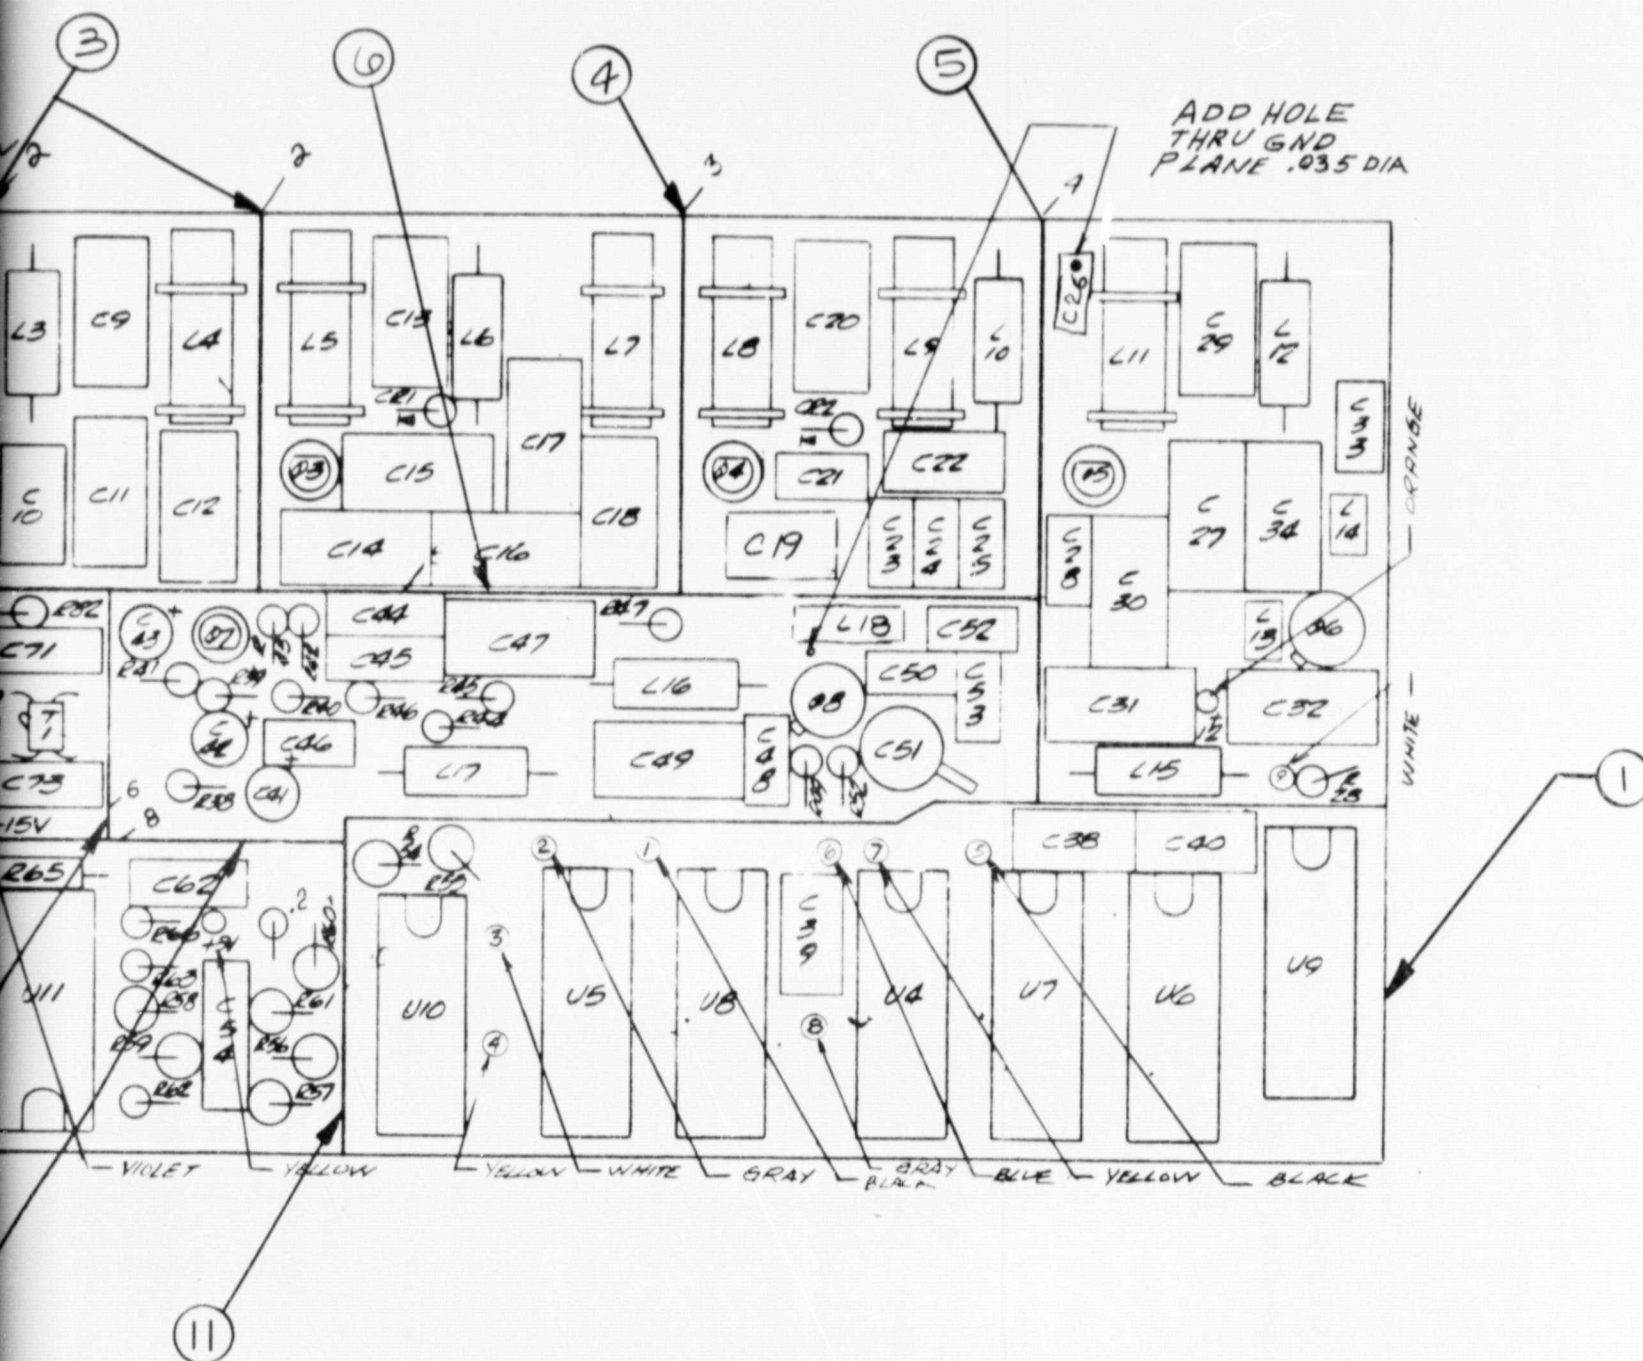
BOARD ASSEMBLY, SYNTHESIZER
